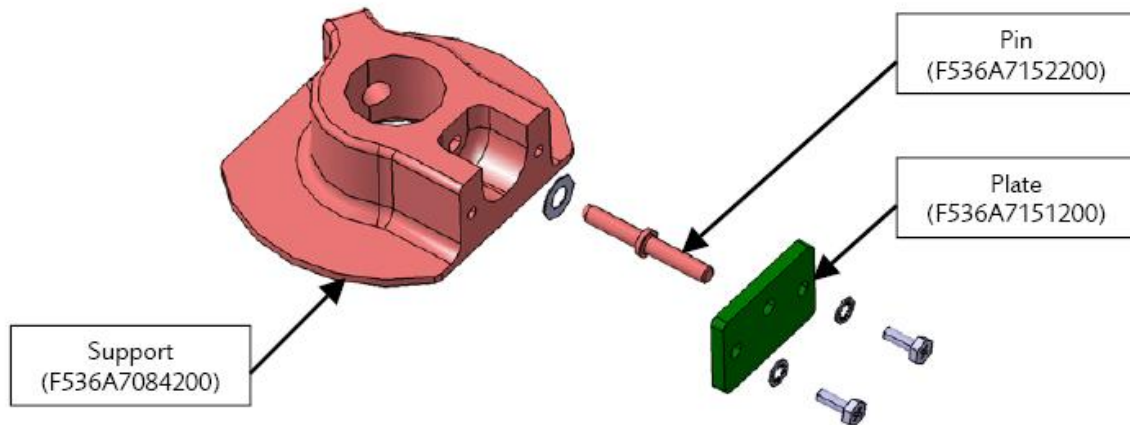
Exploded view of the F536A7150000 assembly (Spring MS24585C146 not showed).
